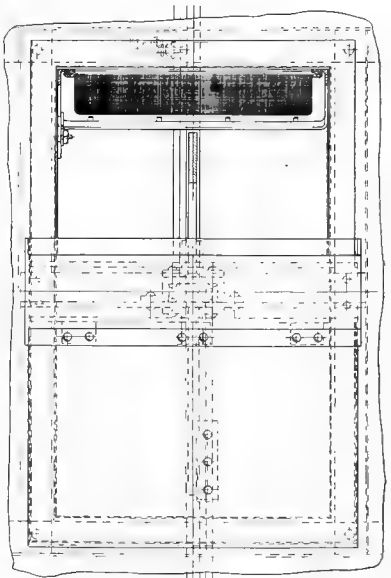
Top View of Fig. 2293, With and Without Hood.
